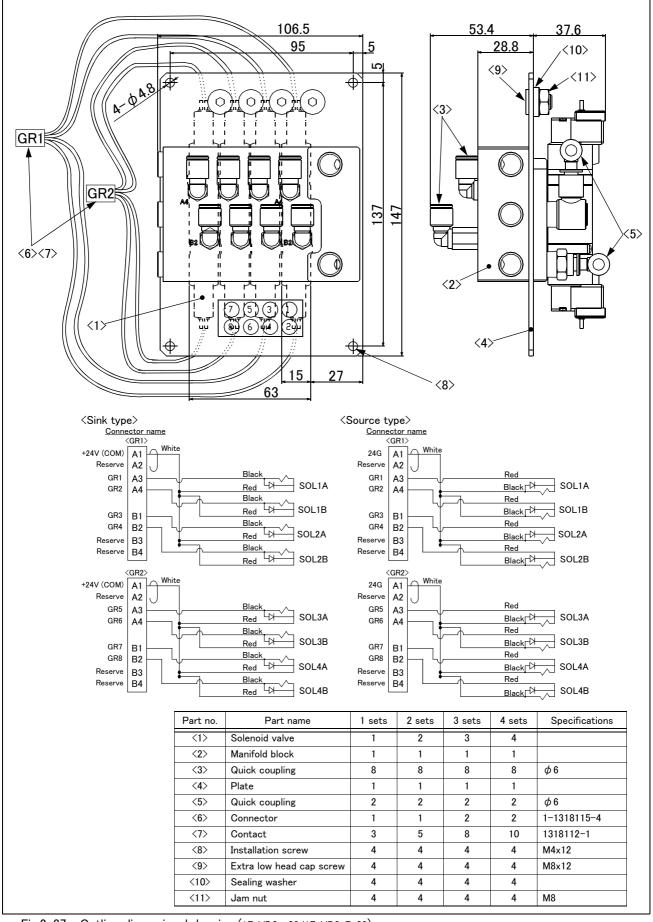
Outline dimensional drawing (1F-VD0*-03/1F-VD0*E-03)
